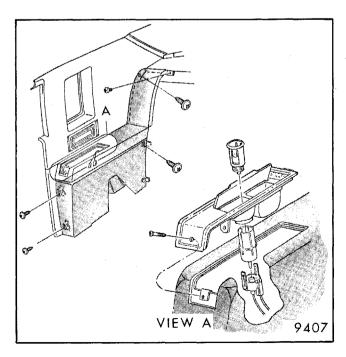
Quarter Lower Trim Assembly Attachment - Oldsmobile E Style Shown, Cadillac E Similar
